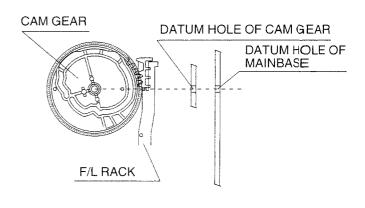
ASSEMBLY OF THE CAM GEAR & F/L RACK
